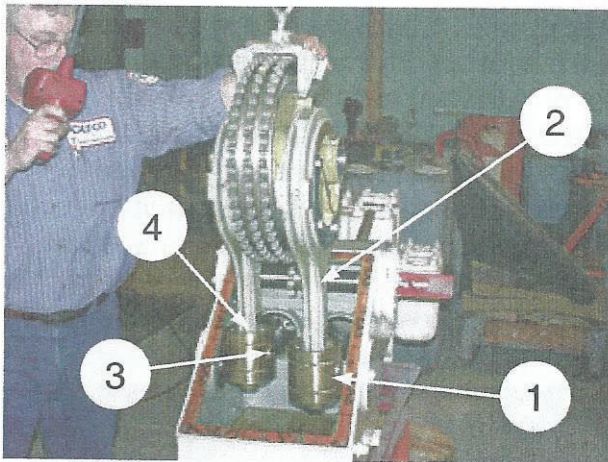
The crossheads [1] are retained to the connecting rods [2] by a set screw into the shaft [3]. These set screws do not appear in the photograph but are visible from a point [4].
